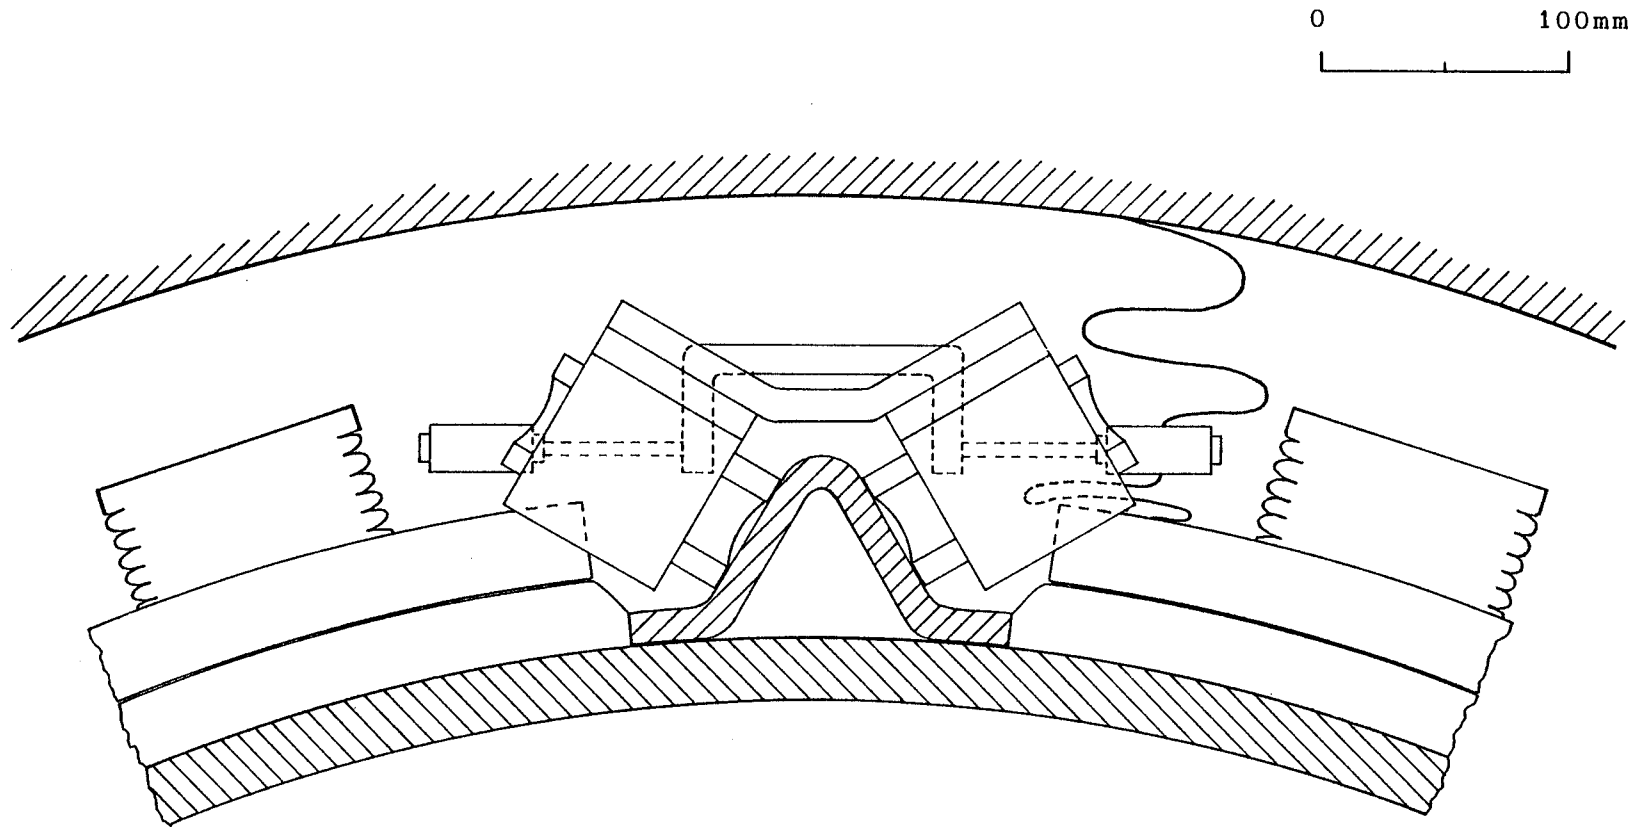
Yaw prevention mechanism, with the bearing nearing full compression.
